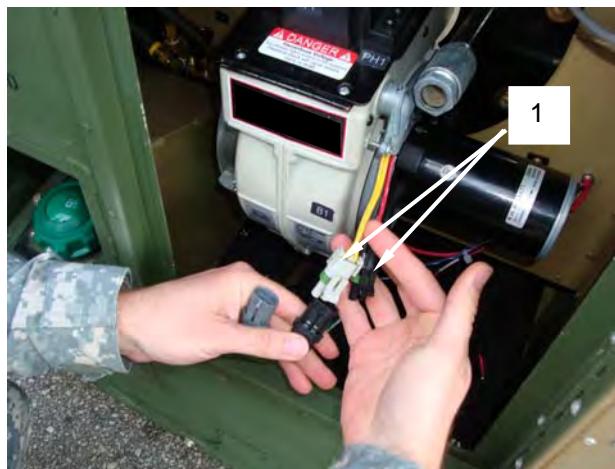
Disconnecting Electrical Connectors from Burner Assembly.
